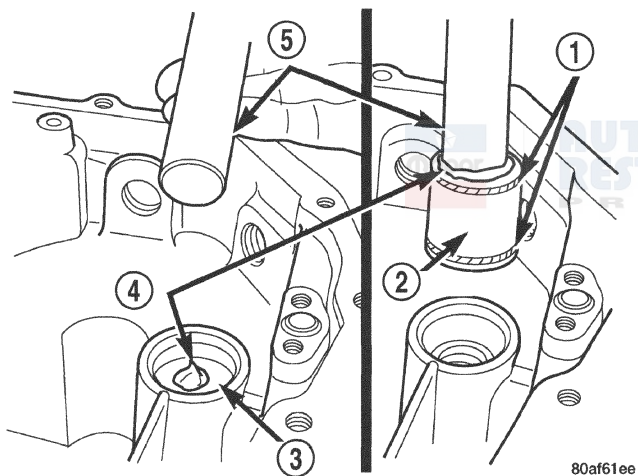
Remove Low/Reverse Accumulator Plug (Cover)
